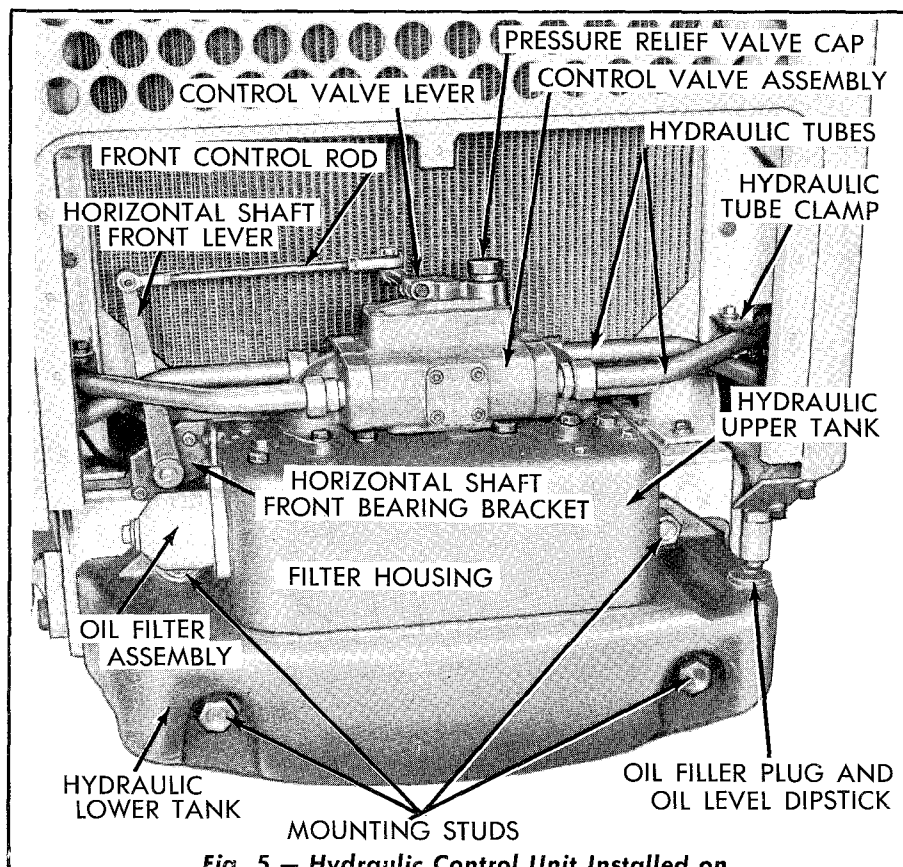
Hydraulic Control Unit Installed on Model HD 11 Tractor
